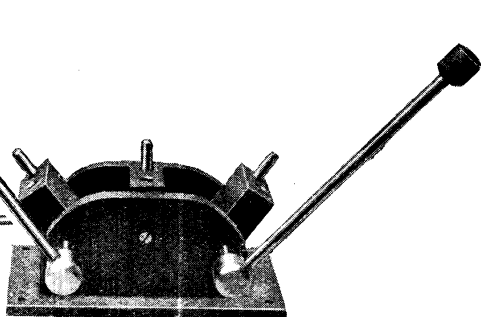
Fine adjustment can be made with this type of holder, which is suitable for panel or base mounting
